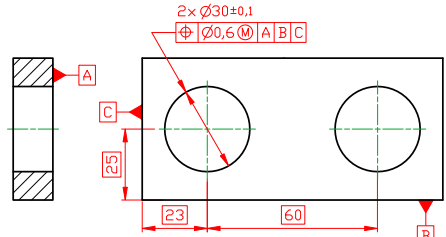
The position tolerance specification for two hole pattern with MMR modifier.
